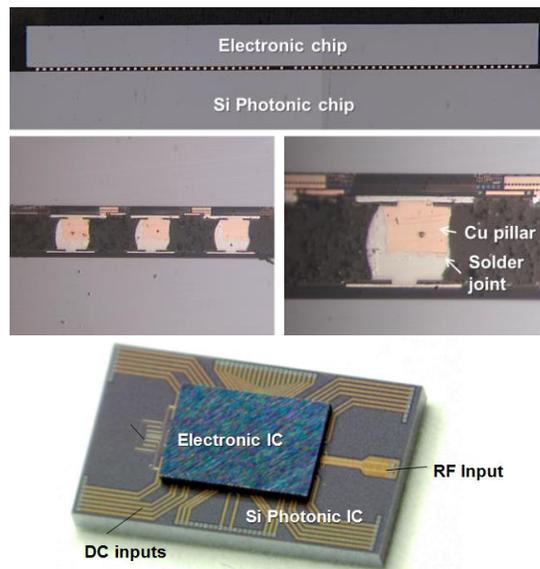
Cross-section of the flip-chip bonded EIC and PIC, showing the Cu-Solder pillars between the two chips. Microscope images of the Cu-Solder pillars after cross-sectional grinding.
